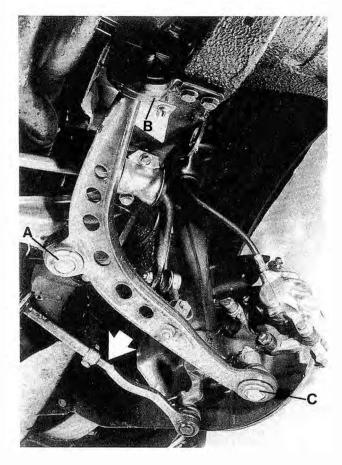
Front suspension control arm viewed from below, showing inner ball joint (A) and rubber bushing (B) mounts, and outer ball joint (C) mount. Arrow points to front. The ball joints are permanently lubricated and surrounded by a protective rubber boot. The only recommended routine maintenance is a periodic inspection for damage and wear. The rubber bushing at the rear of each arm is replaceable. The ball joints, however, cannot be replaced separately. If the ball joints are worn, the entire control arm must be replaced as a unit.
